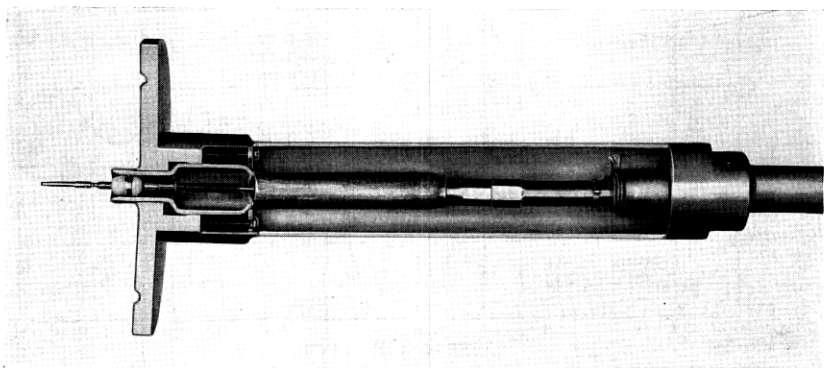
Cross section through head of 66A1-1 cable terminal with modified compensating sleeve.
